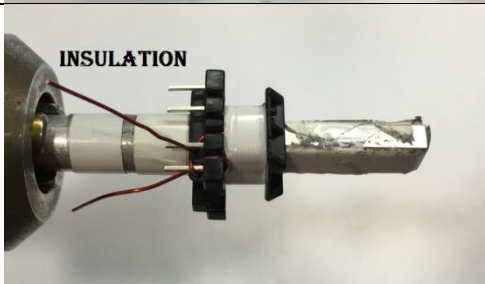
Transformer “Z Winding Technique” Build Diagram.
